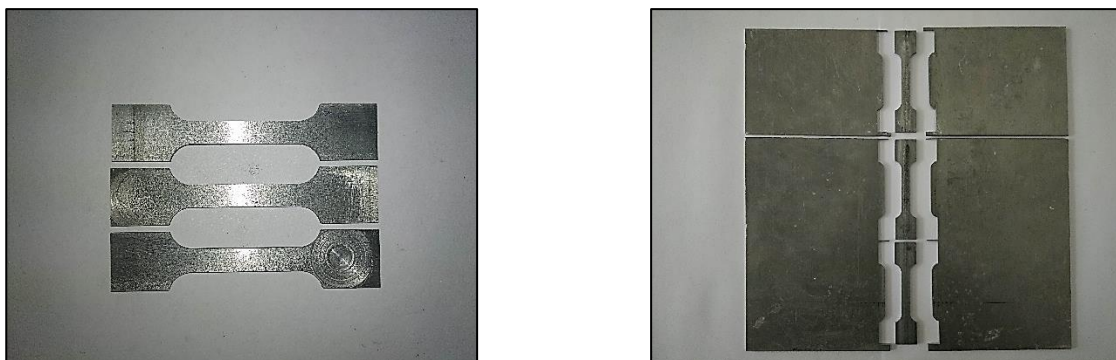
Tensile testing specimen cut from the annealed and non-annealed sheet
